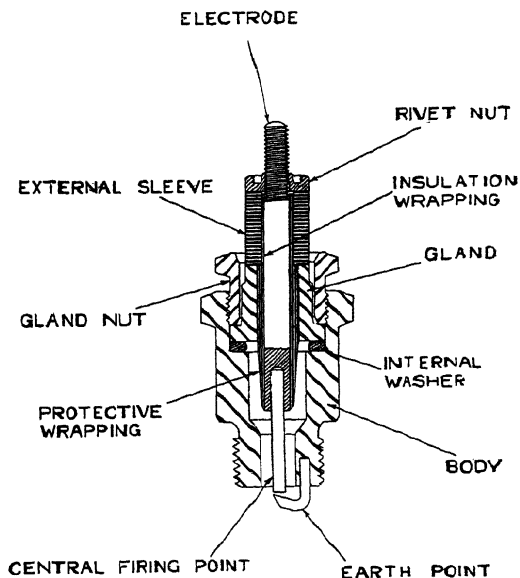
VARIOUS POINTS IN K.L.G. PLUG MANUFACTURE
